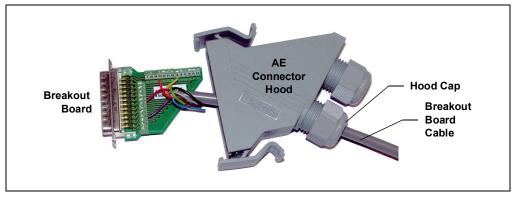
Installing the Breakout Board in the AE Connector Hood
